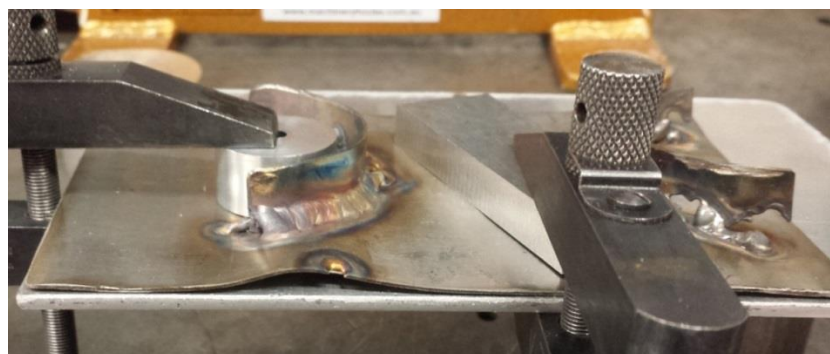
A stainless steel fillet weld test, jigged to an aluminium plate and welded in the open. Disregard the unrelated weld on the right; only the left-hand weld is relevant to this test.
